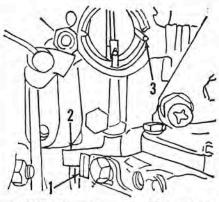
Reverse throttle pickup adjustment used on Merc 800.
